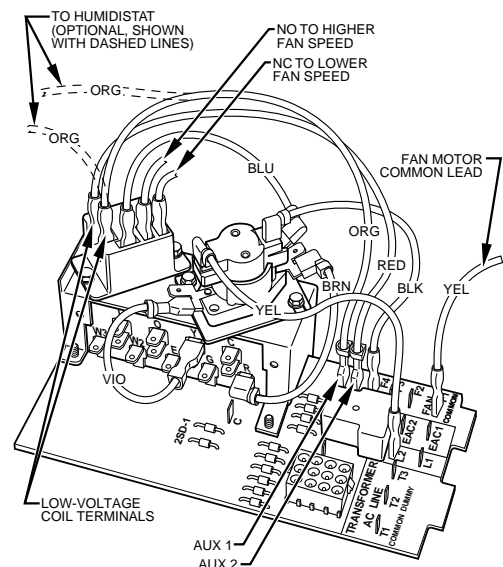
Two-Speed Fan Relay Wiring and Mounting Location
